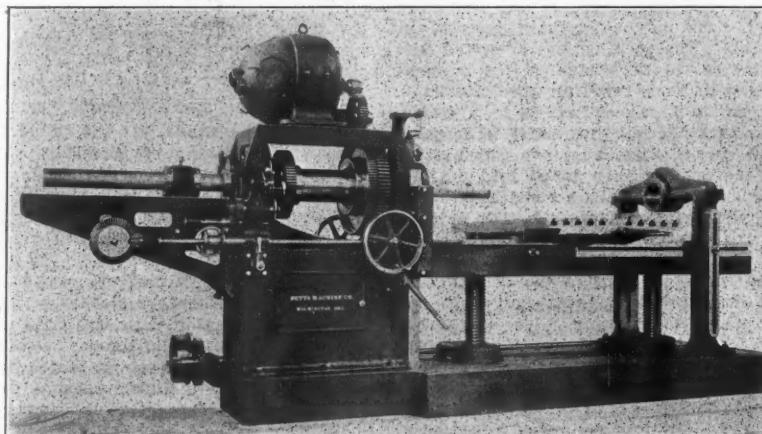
The Betts No. 3 Horizontal Boring Machine.
